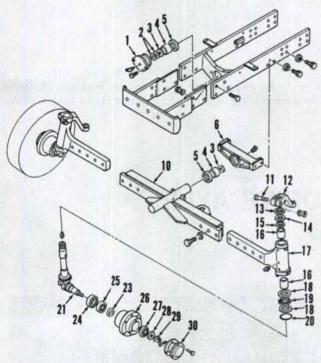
Exploded view of adjustable tread width front axle assembly used on Model 1720. Axle assembly used on Models 1920 and 2120 is similar except that spacer (23) is not used on Model 2120.
